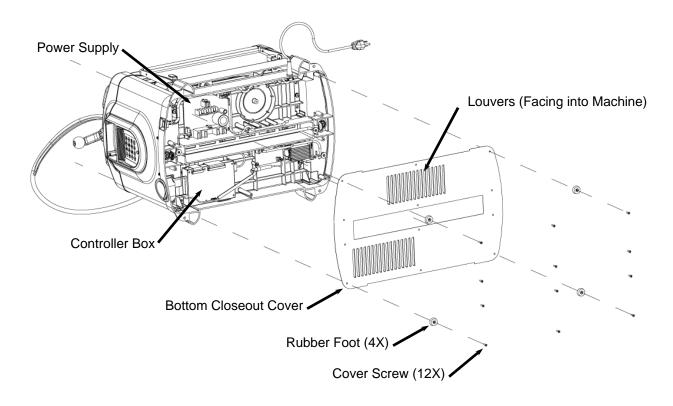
REMOVAL OF THE BOTTOM COVER
